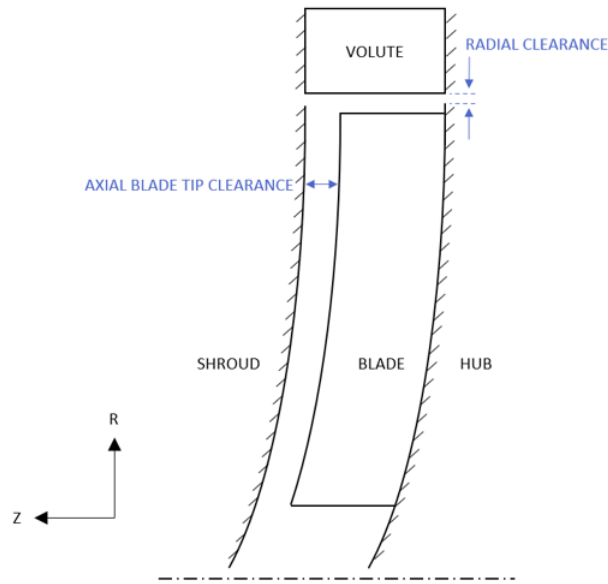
Definition of axial blade tip clearance in an unshrouded impeller.
